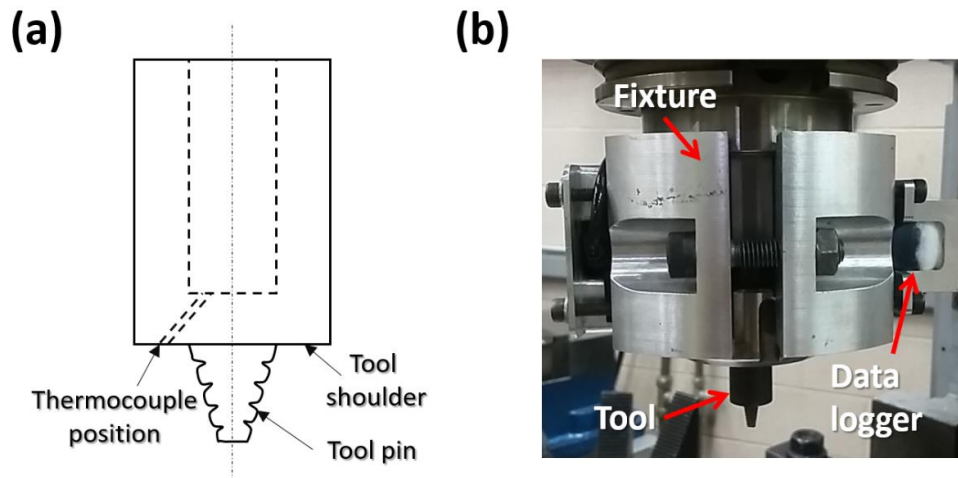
(a) Design of tool with holes for temperature measurements. (b) Fabricated fixture with data logger casing and thermocouple ports.
